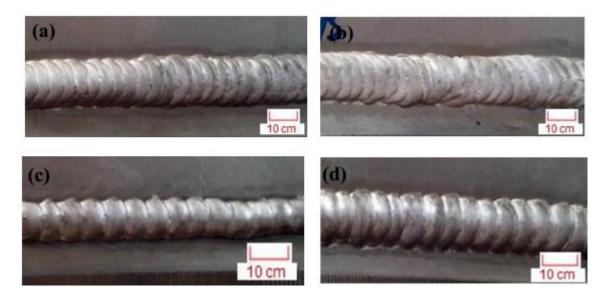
Weld appearance of specimens (a) specimen 1, (b) specimen 6, (c) specimen 9 and (d) specimen 14.
